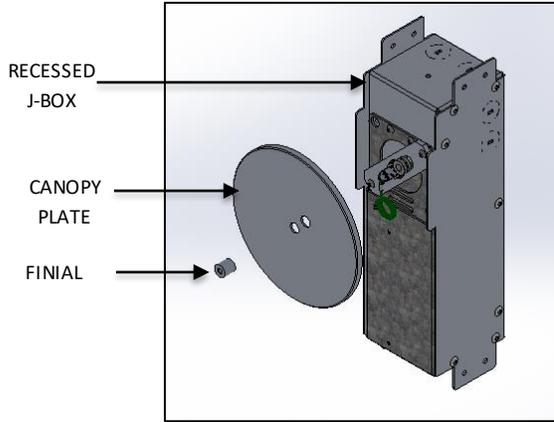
FINIAL AND CANOPY DISASSEMBLY
